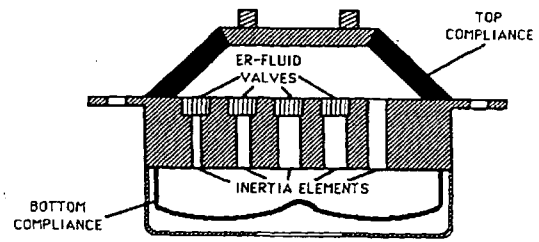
Hydraulic mount ER fluid<sup>44)</sup>
